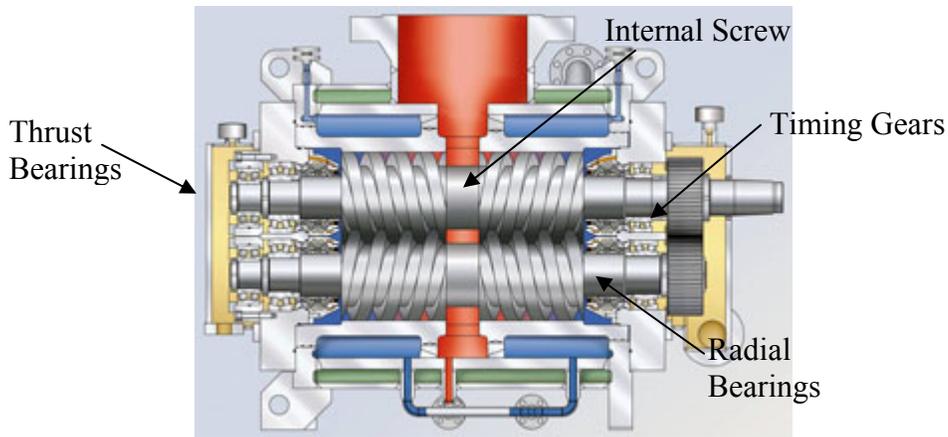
Internal Bearing Twin Screw Pump Design [1].
